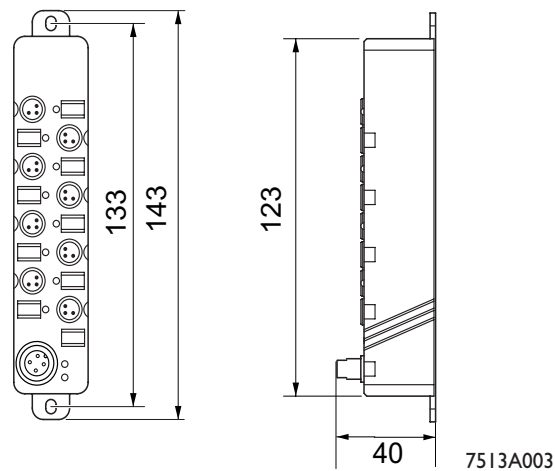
Housing dimensions of Fieldline Extension AS-i M8 devices in mm (digital I/O devices)
